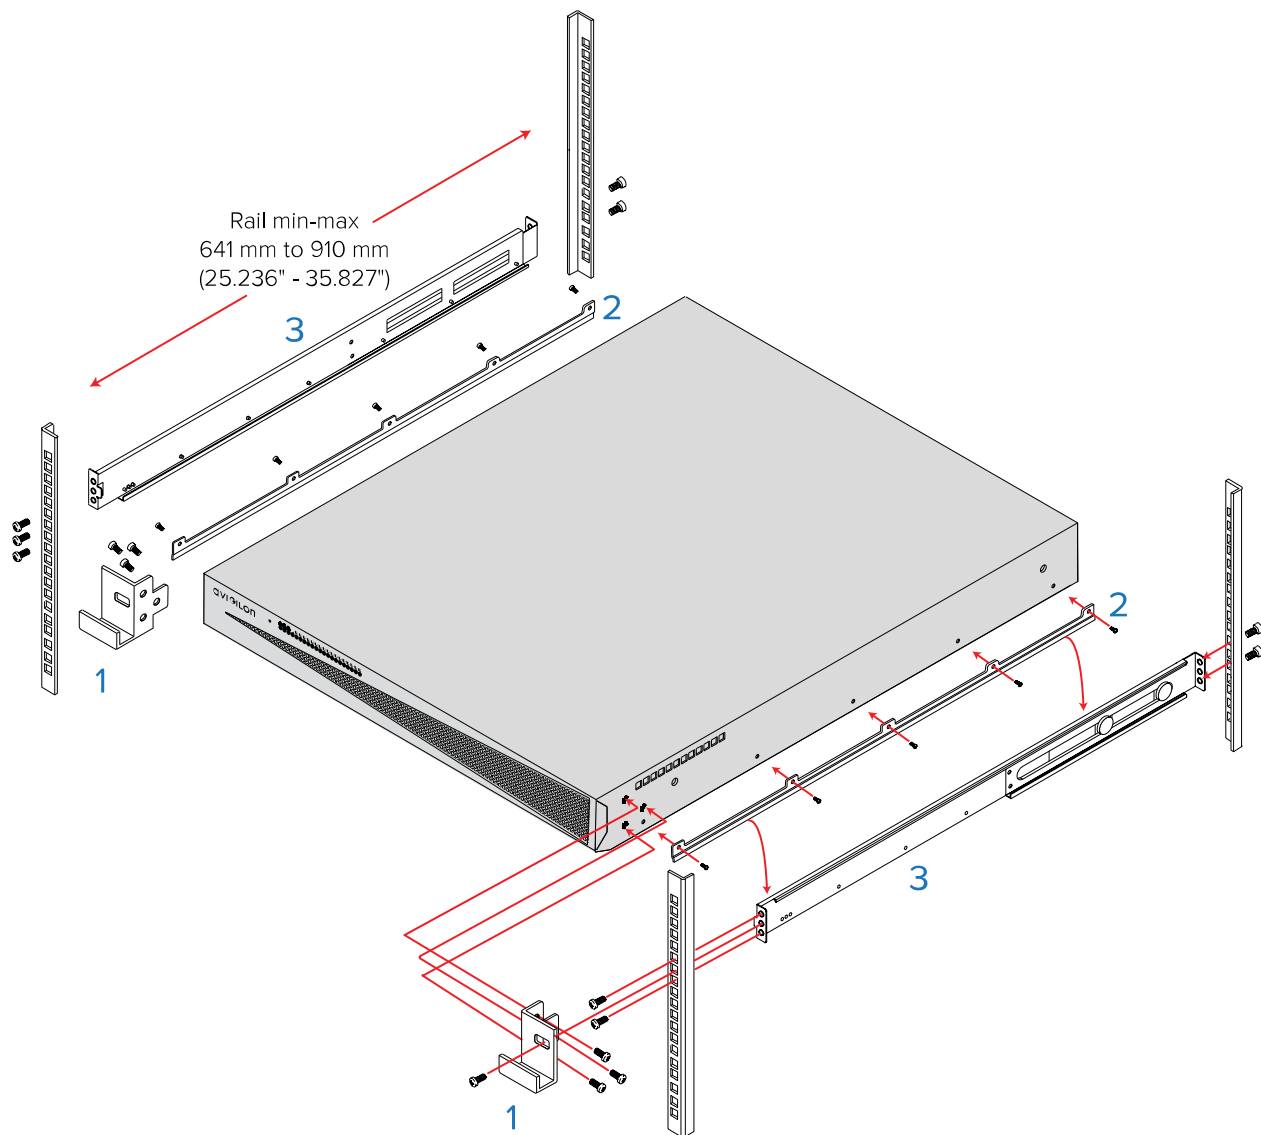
Check each mounting rail to verify on which side of the rack the rail is attached.
